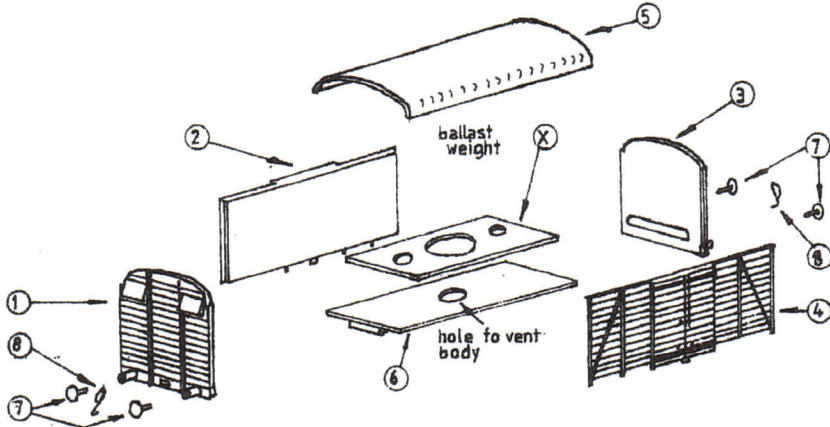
EXPLODED DRAWING INDICATING THE FIT OF PARTS NOTE WHILST THE DRAWING SHOWS THE EQUAL PLANKED VERSION, ASSEMBLY METHODS ARE IDENTICAL FOR ALL THREE VAN BODY TYPES
